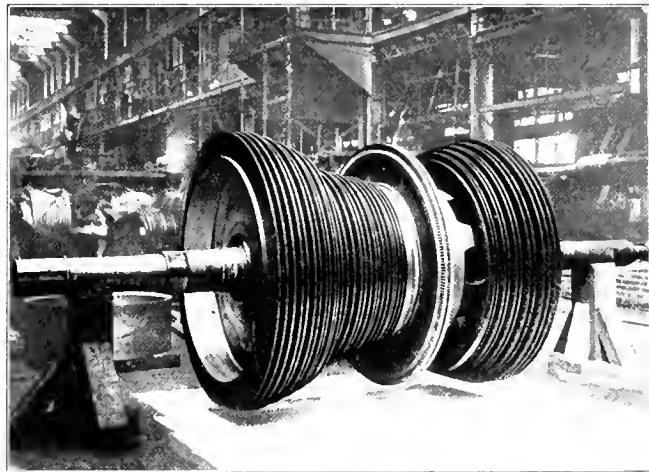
View of the Rotor showing the Uniformity of the Blading
